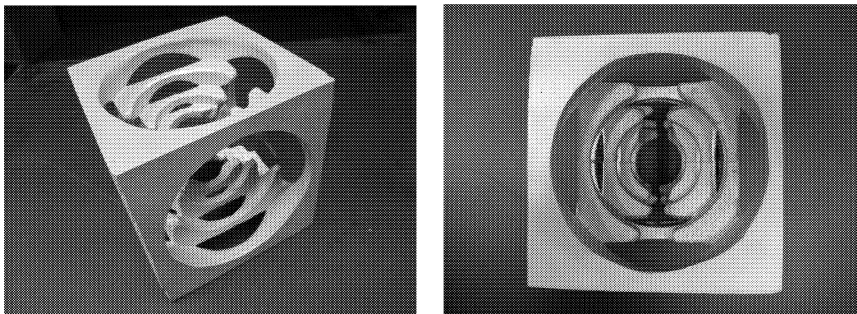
Turner’s cube produced from a 3D binder jetted sand mold.
